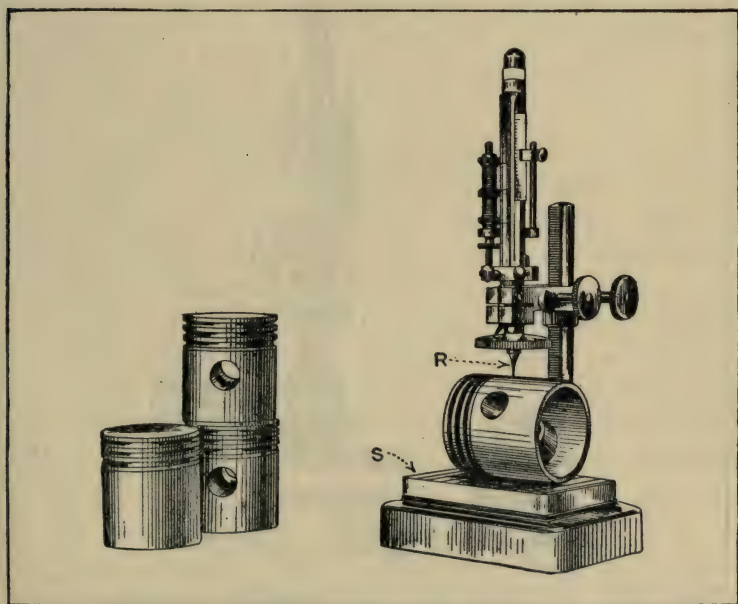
A. PRESTWICH GAUGE USED IN GAUGING A PISTON
